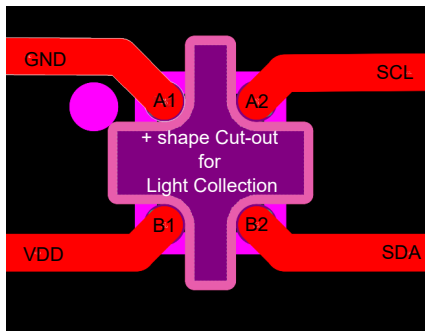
Layout Example With a Plus Shaped Cut Out
